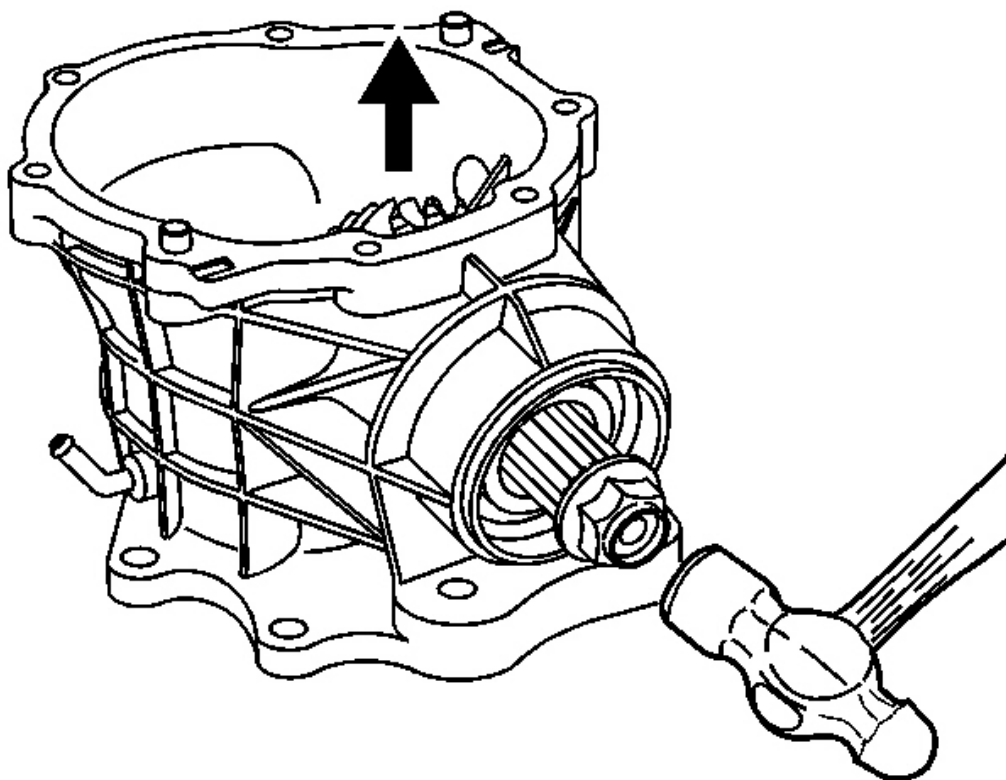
Installing Pinion Nut On The Threads Of The Pinion Shaft
